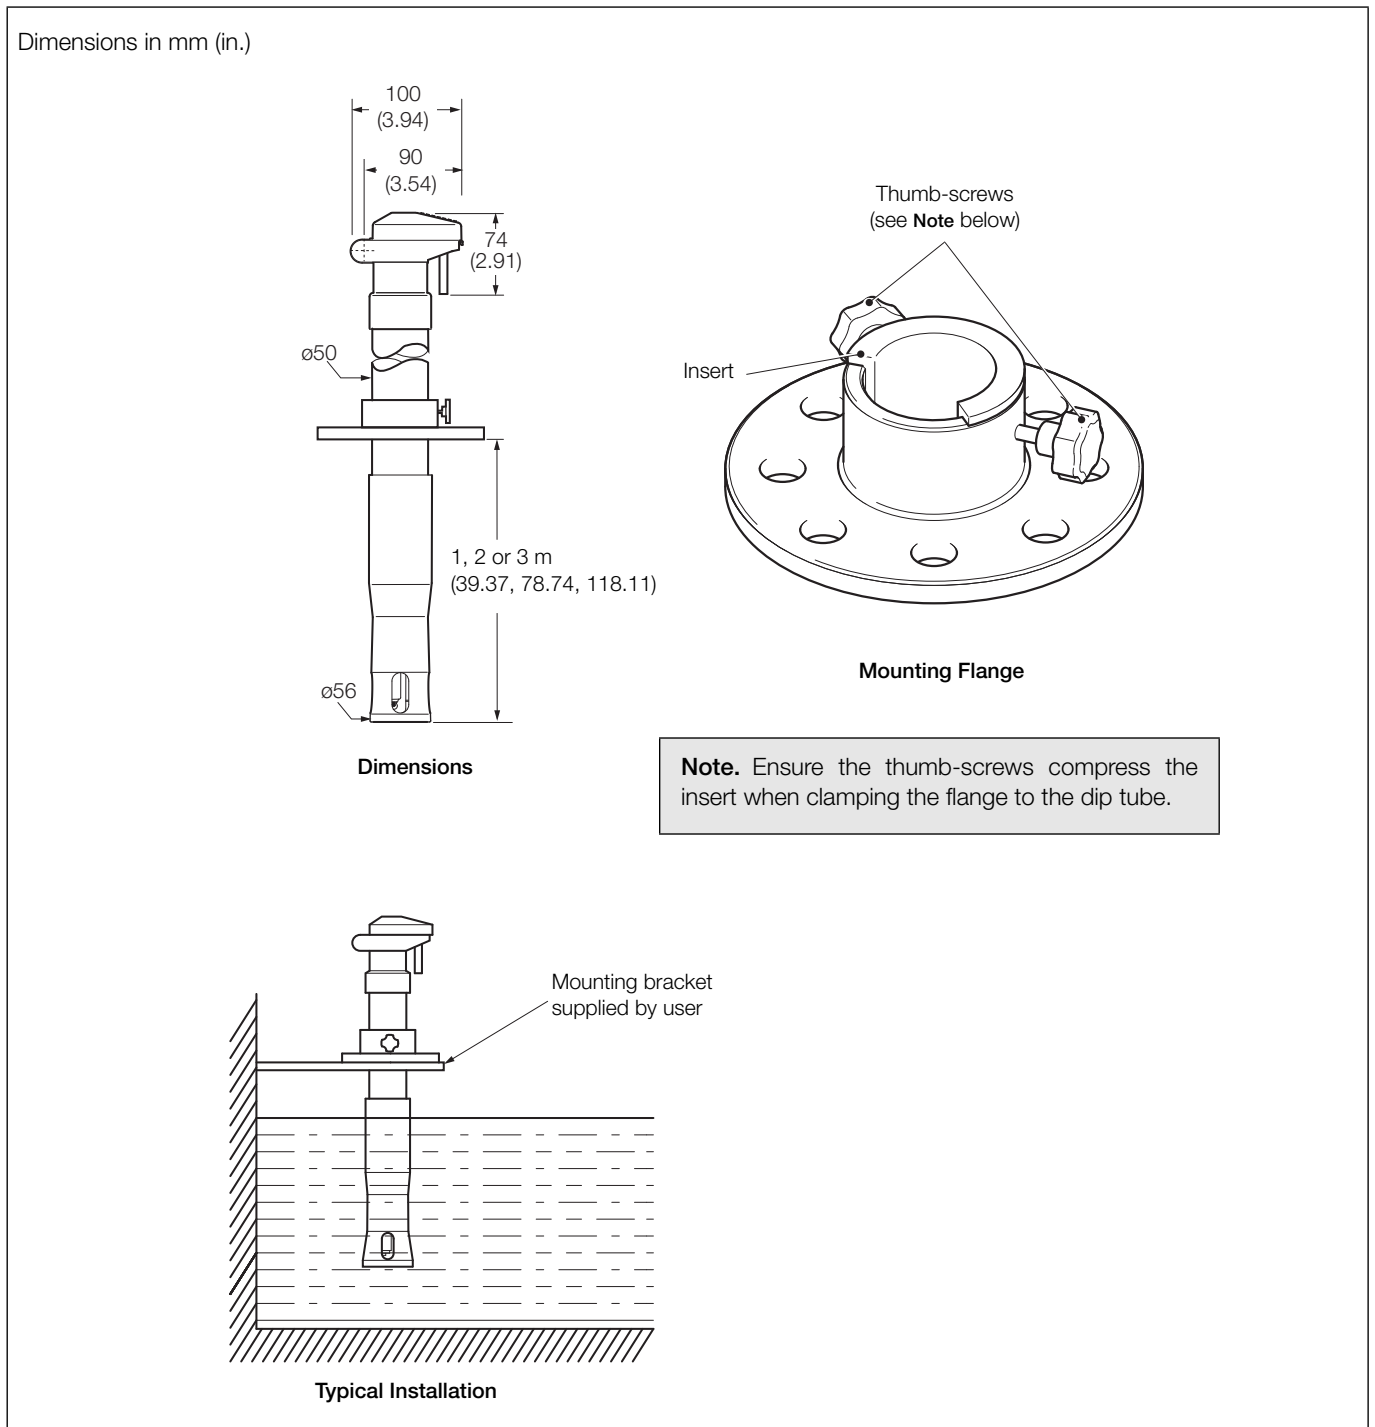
Model AP203 Flanged Dip (Immersion) System
